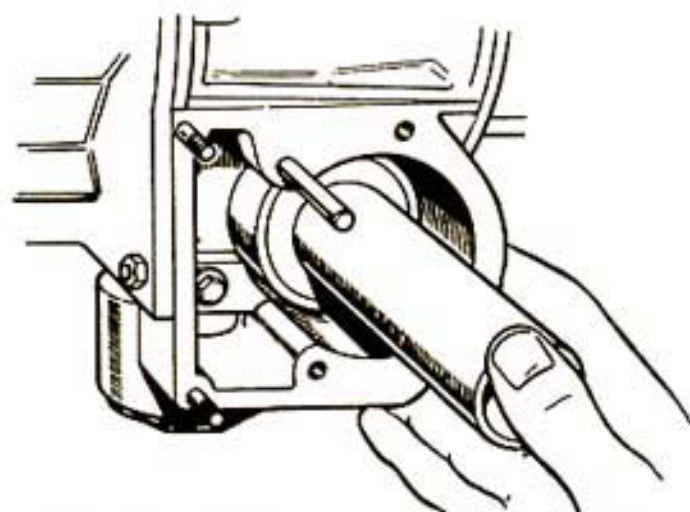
FITTING ACCUMULATOR PISTON, SLEEVE AND SPACING TUBE
